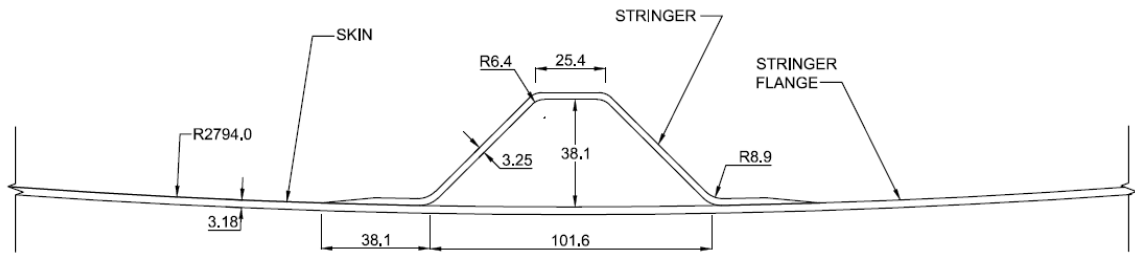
Stringer with Tapered Flange Geometry. (All Dimensions in mm.)
